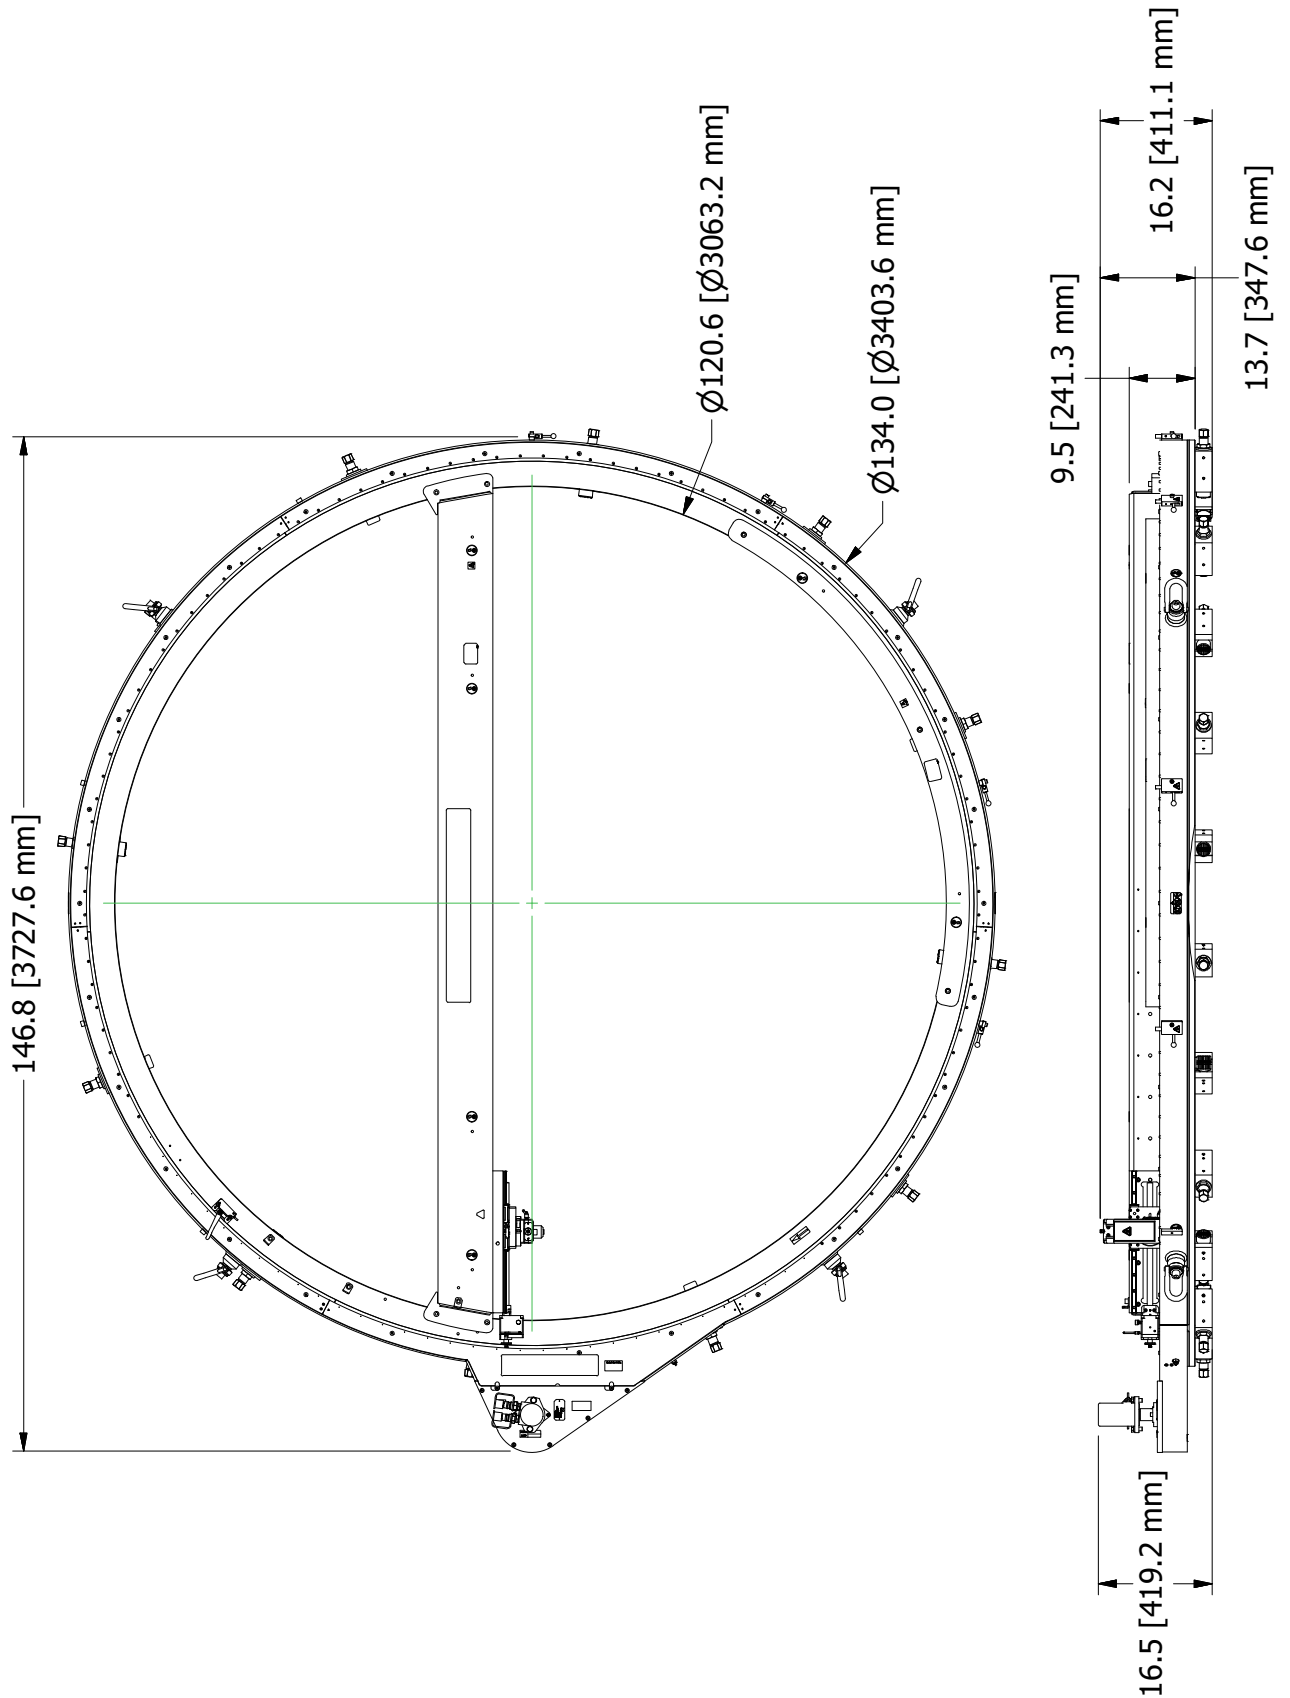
ODF120 SPEED FACER DIMENSIONS (P/N 7639-S1)
